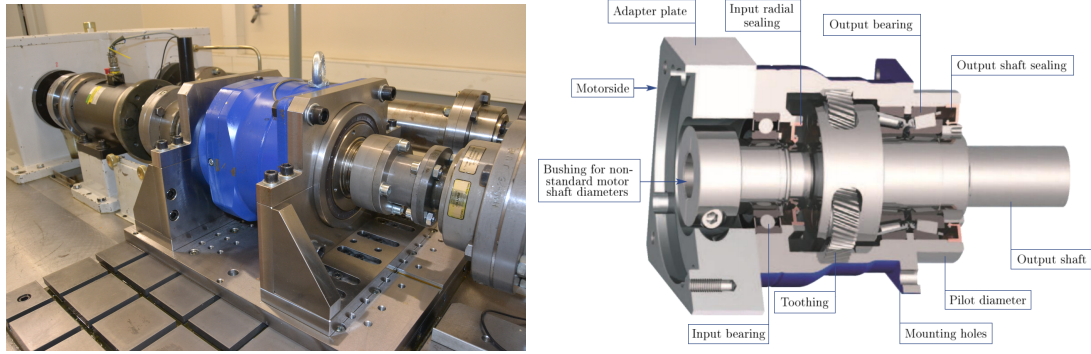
Planetary gearbox installed in the test rig and schematic.
